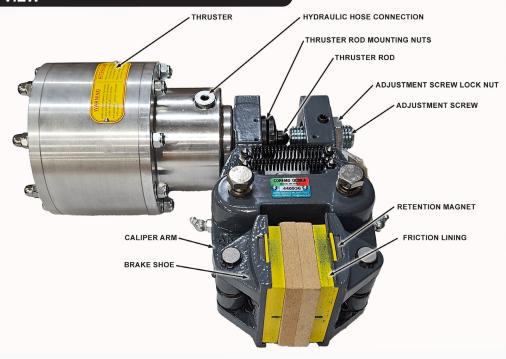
CALIPER BRAKE COMPONENT IDENTIFICATION SIDE VIEW
